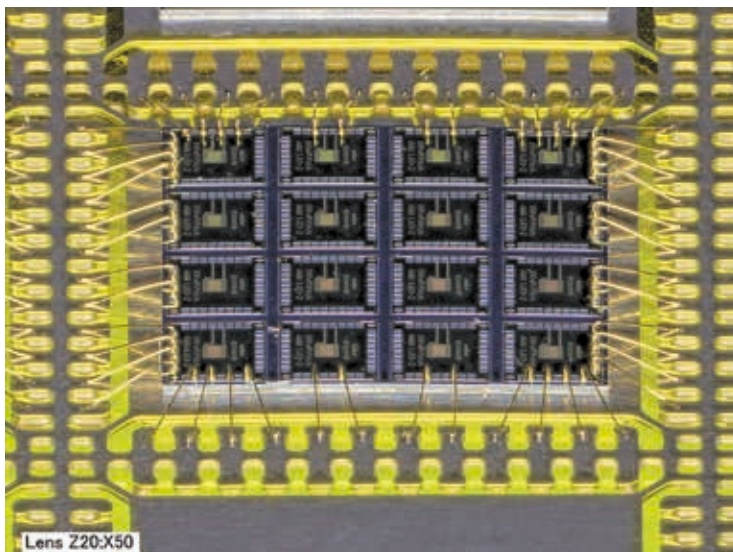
Top view of cDAF showing large die-to-pad ratio with no squeeze out or fillet.
